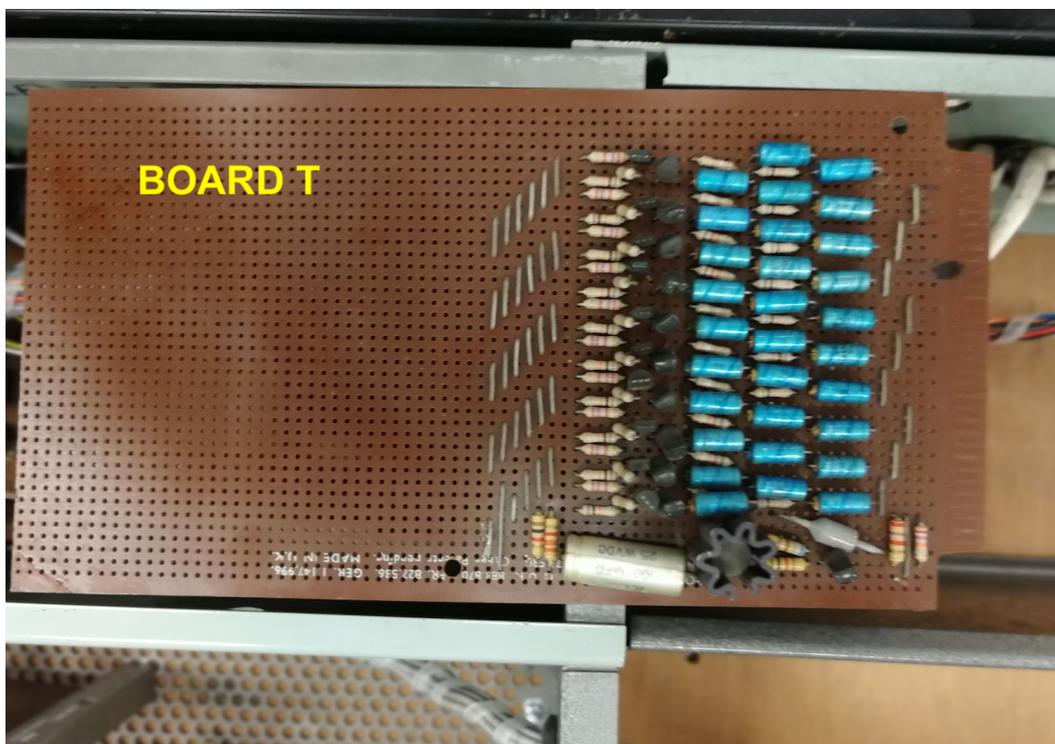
pcb labelled 'T'. This is the mixer circuit board for the BU
